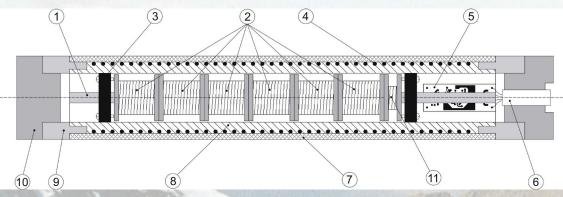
design of induction sensor: 1 – ferromagnetic core; 2 – section of measuring coil; 3 – rubber seal (shock); 4 – calibration coil, 5 – preamplifier; 6 – connector; 7 – layout; 8 – internal housing (screen); 9 – locking cylinder; 10 – stopper; 11 – additional compensation coil.
